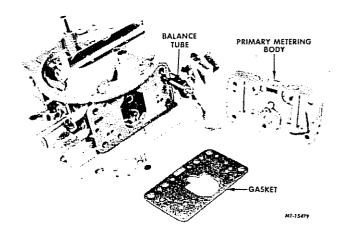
REMOVING OR INSTALLING PRIMARY METERING BODY (WITH PUMP TRANSFER TUBE)
